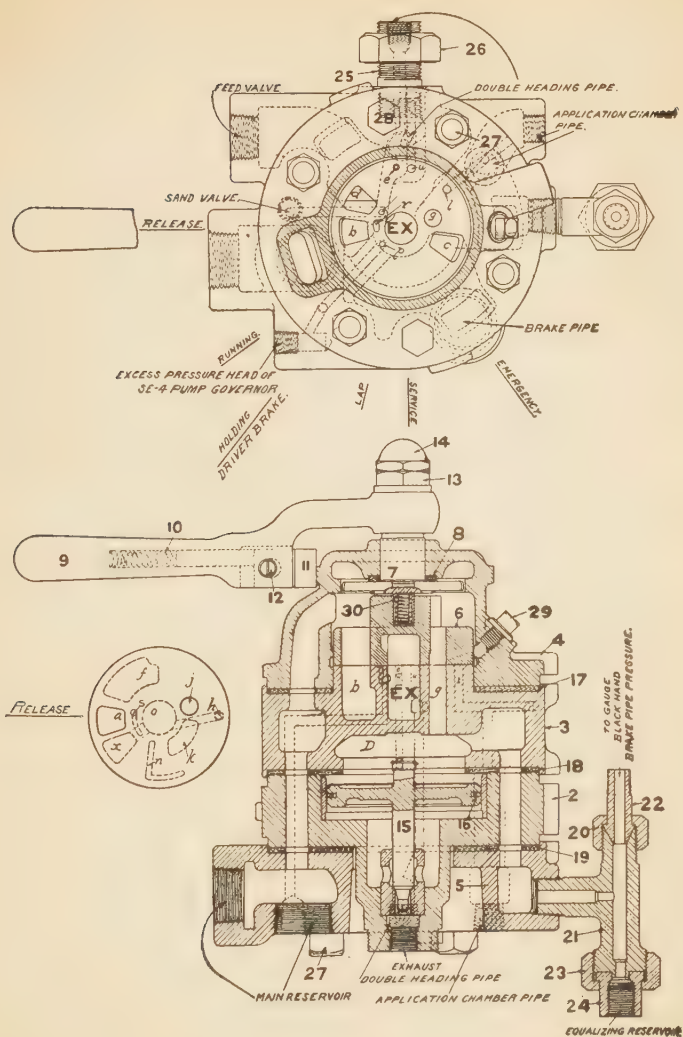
H5 AUTOMATIC BRAKE VALVE
